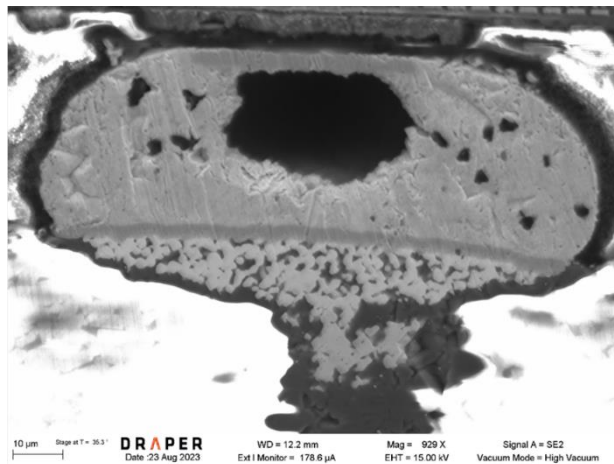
SEM image of a solder connection with a large void that covers the chip bond pad. Several smaller voids are also visible in the solder.
